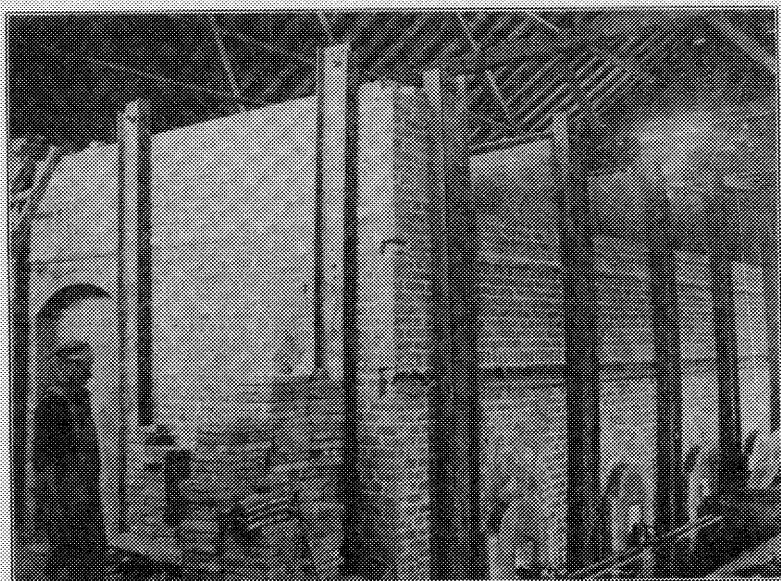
Outside View of Mitchell Kiln, Detroit Roofing Tile Co., Detroit, Mich.
